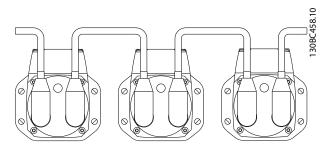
Hybrid Cable Connection for ISD Flange
